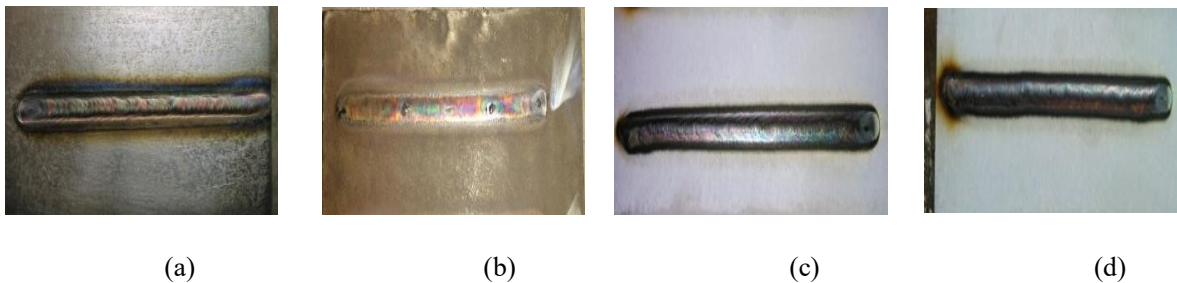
Photograph of weld bead on workpiece (a) without flux (b) MnO₂ flux (c) TiO₂ flux (d) SiO₂ flux
